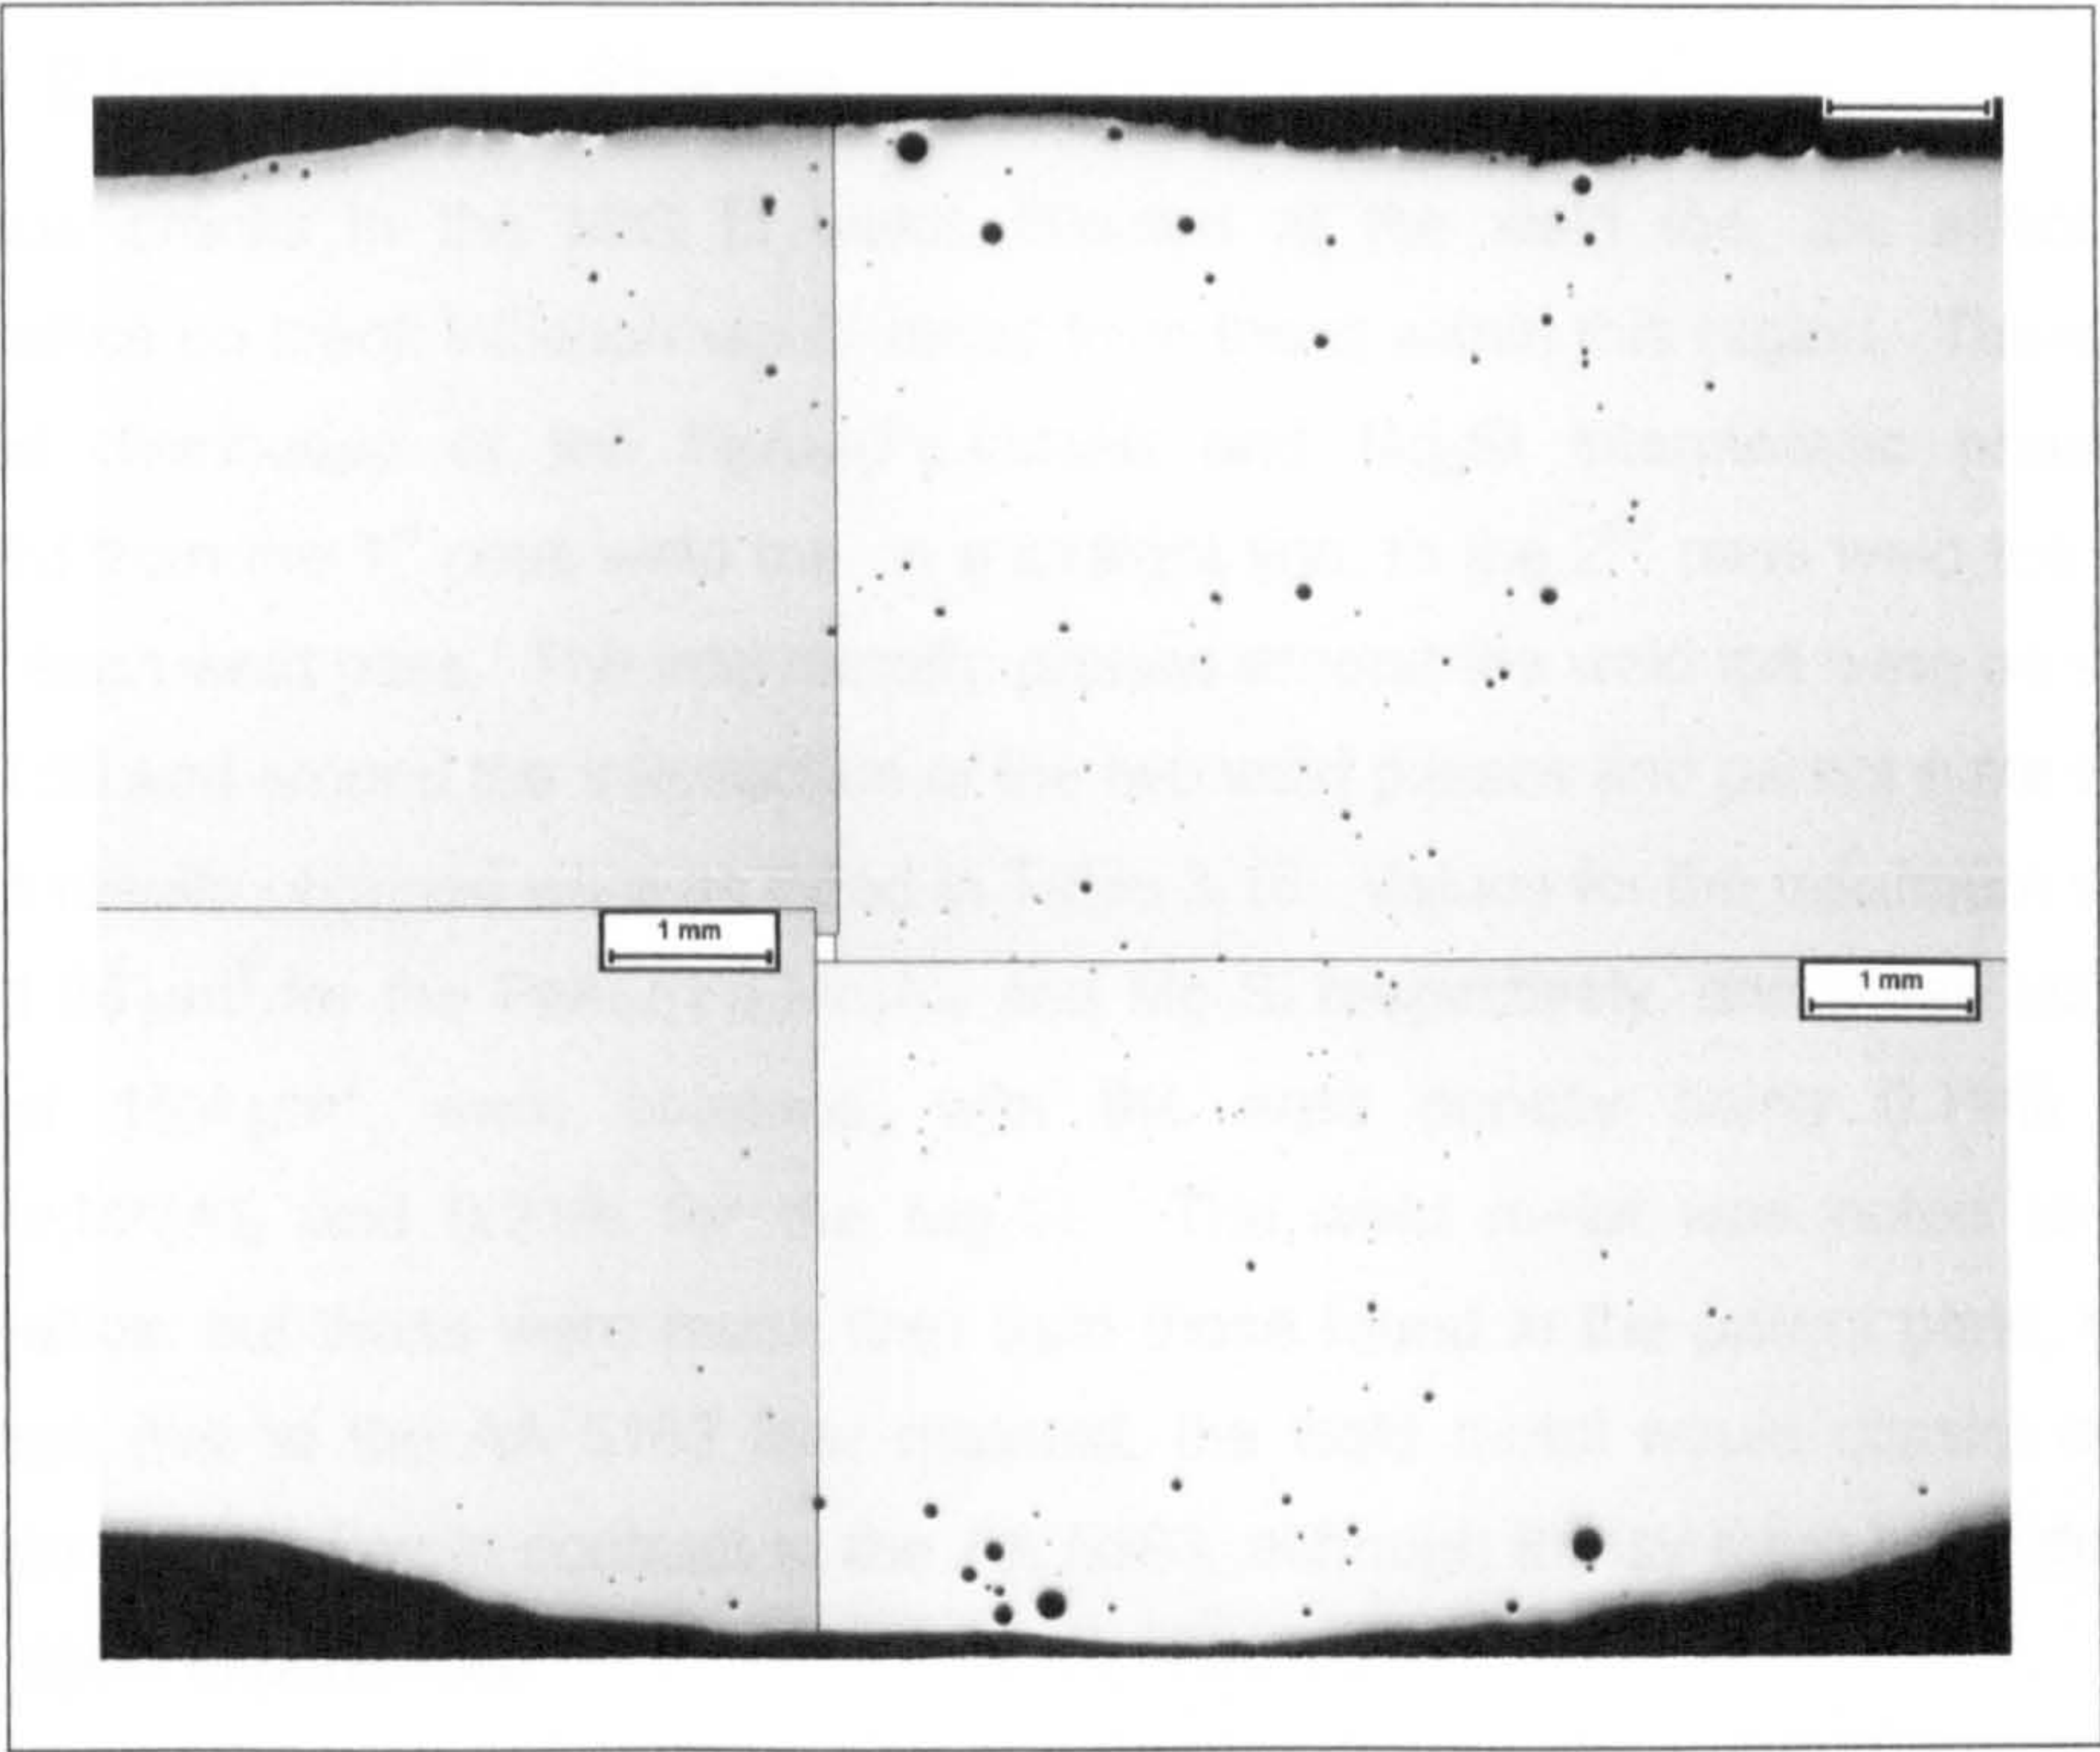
Weld porosity in MIG LI weld, second pass uppermost.
